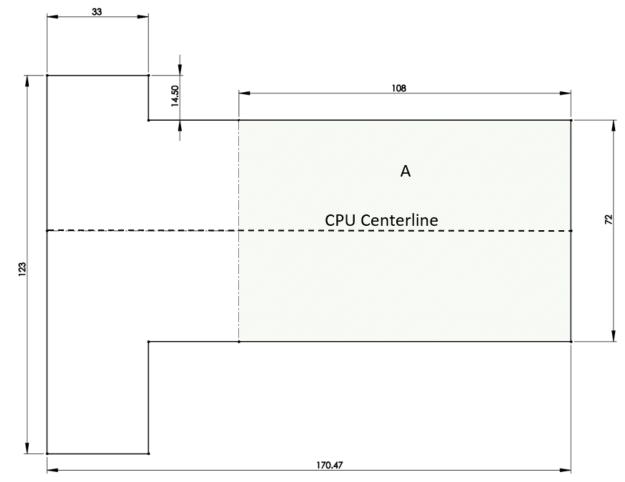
CPU cooling solution footprint. All dimensions in mm
